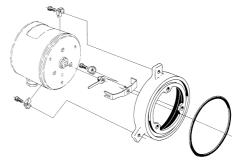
Accessory kit for pressure gauge mounting (see "Feature 12.")
